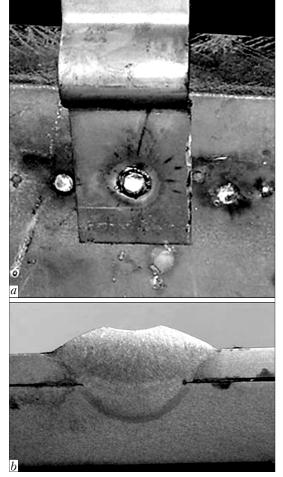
Appearance of spot welded joint produced by ASW in vertical position (a) and its macrosection (b)
